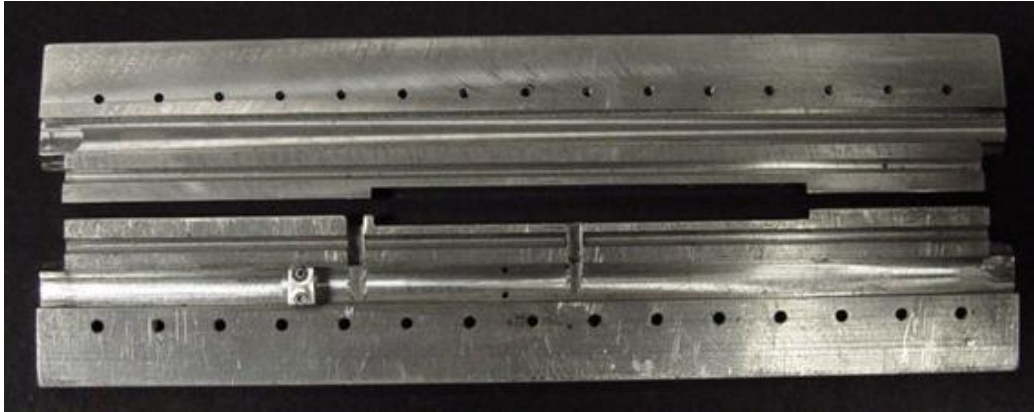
Inside of Aluminum Top and Bottom Leading Edge Pieces
